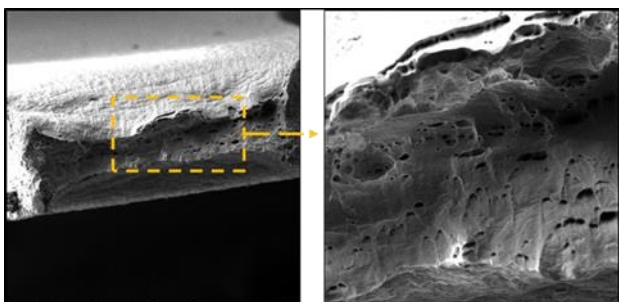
Tensile fracture surfaces of commercial purity Copper
